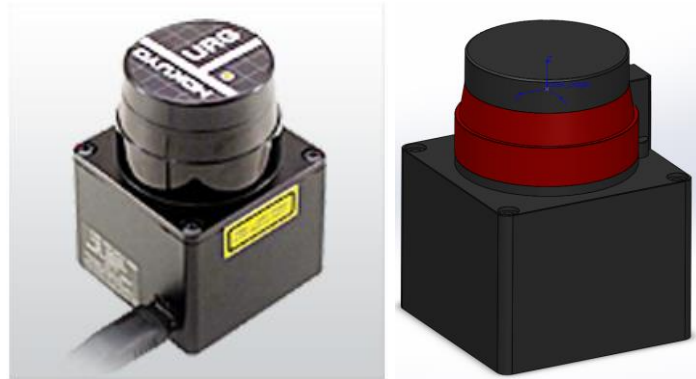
URG-04LX-UG-01 Laser scanner & its 3D solidWork model [24]
